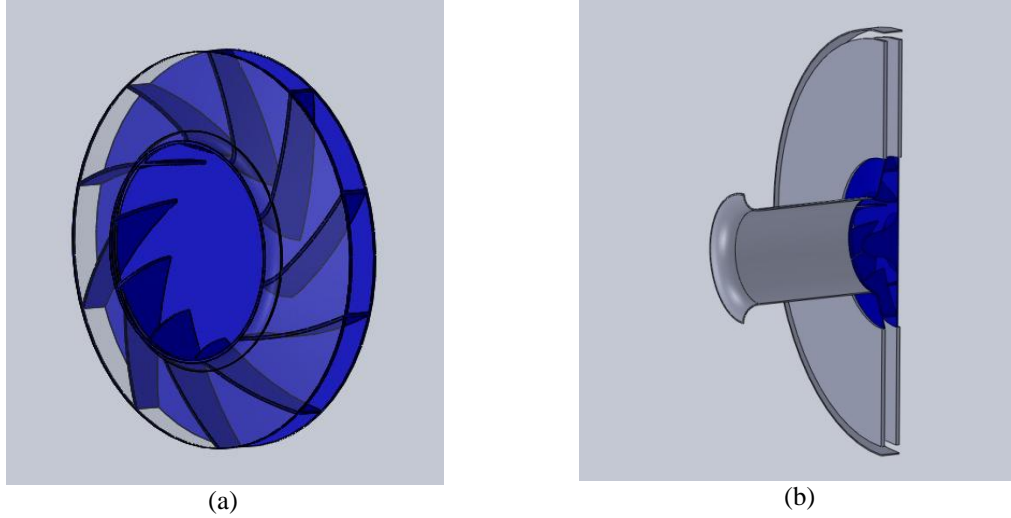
CAD model: (a) rotor with 10 circular arc blades; (b) radial fan cross-section.
